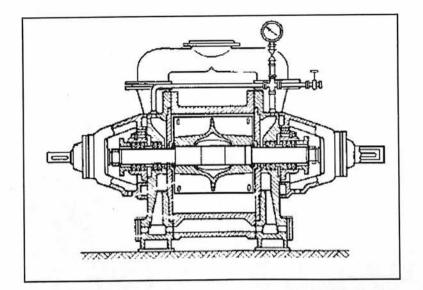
Liquid ring compressor, single-stage, with double impeller (Courtesy: H. Bannwarth; Liquid Ring Vacuum Pumps, Compressors and Systems)
